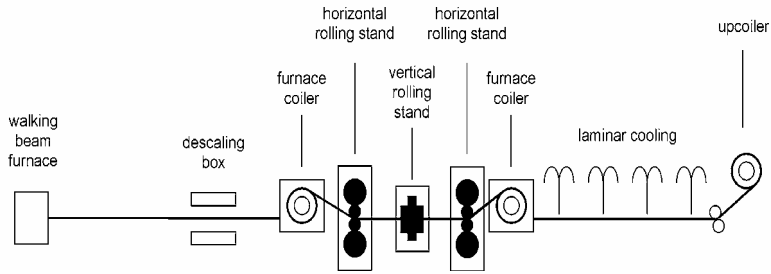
Layout of the two-stand reversible Steckel hot-rolling mill in ISPAT NOVA HUT, a.s. [12]
